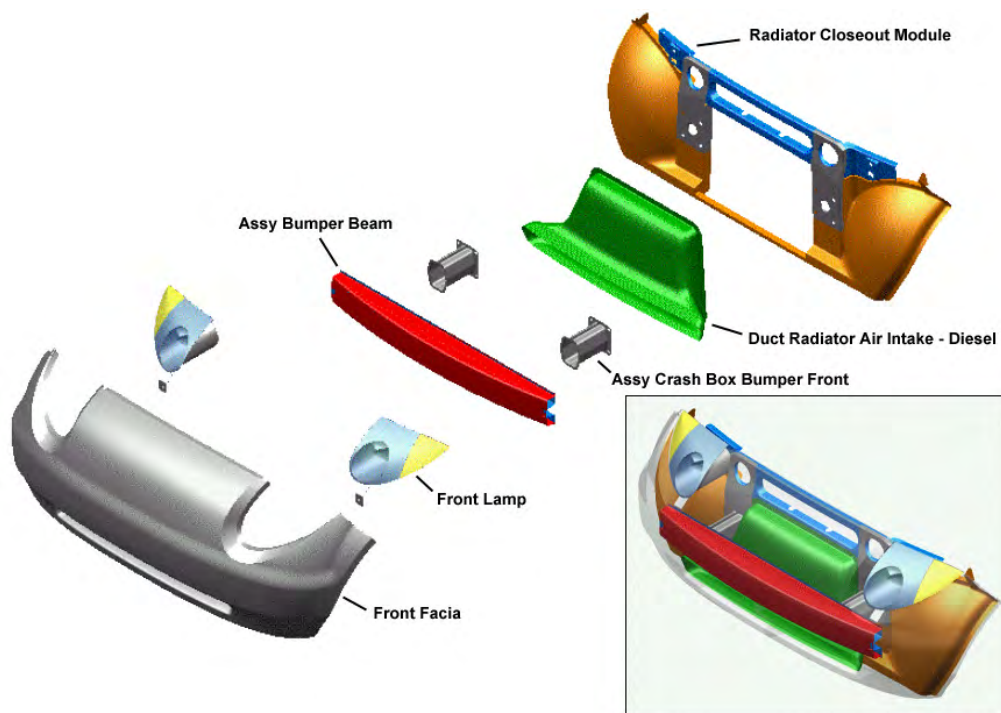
Front fascia module exploded view (diesel)
